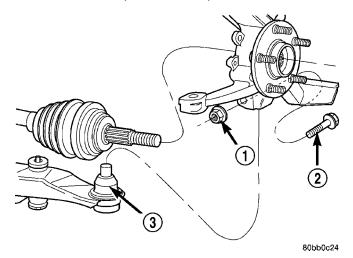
Halfshaft Installation Into Hub And Knuckle
